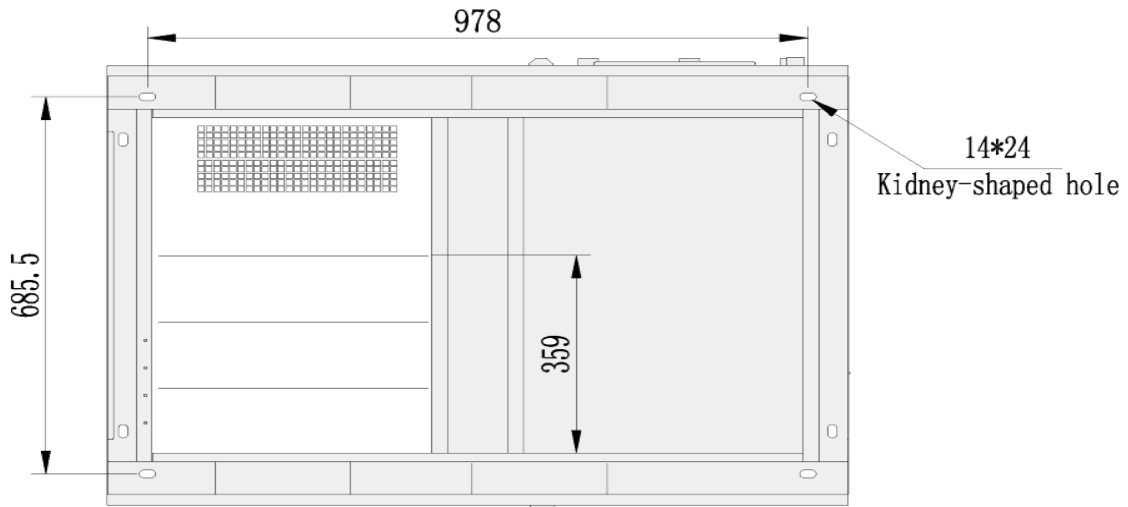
PWS1-500K rack wiring hole in bottom view
